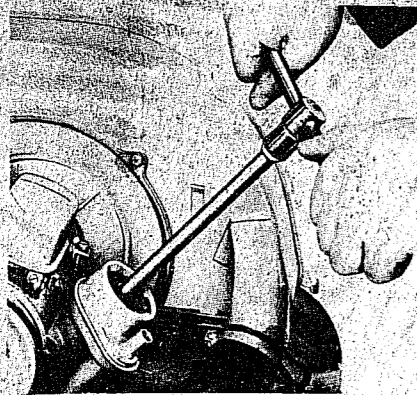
Removing the threaded ring for the oil filler, using a special socket.
